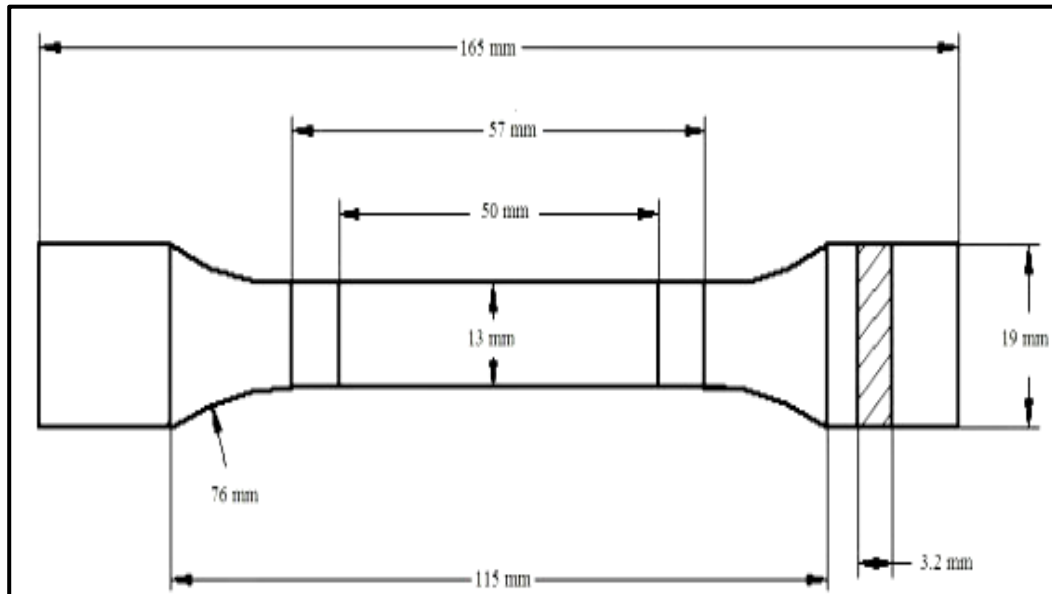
Dog bone shape of polyester composite, using the dimensions of ASTM D638¹
